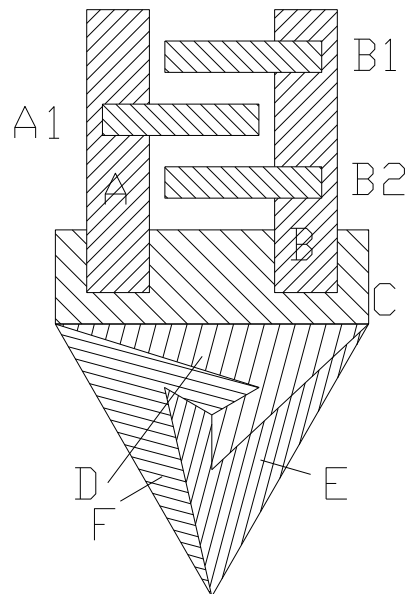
A product that can be assembled with a NC-NS-L-M assembly
